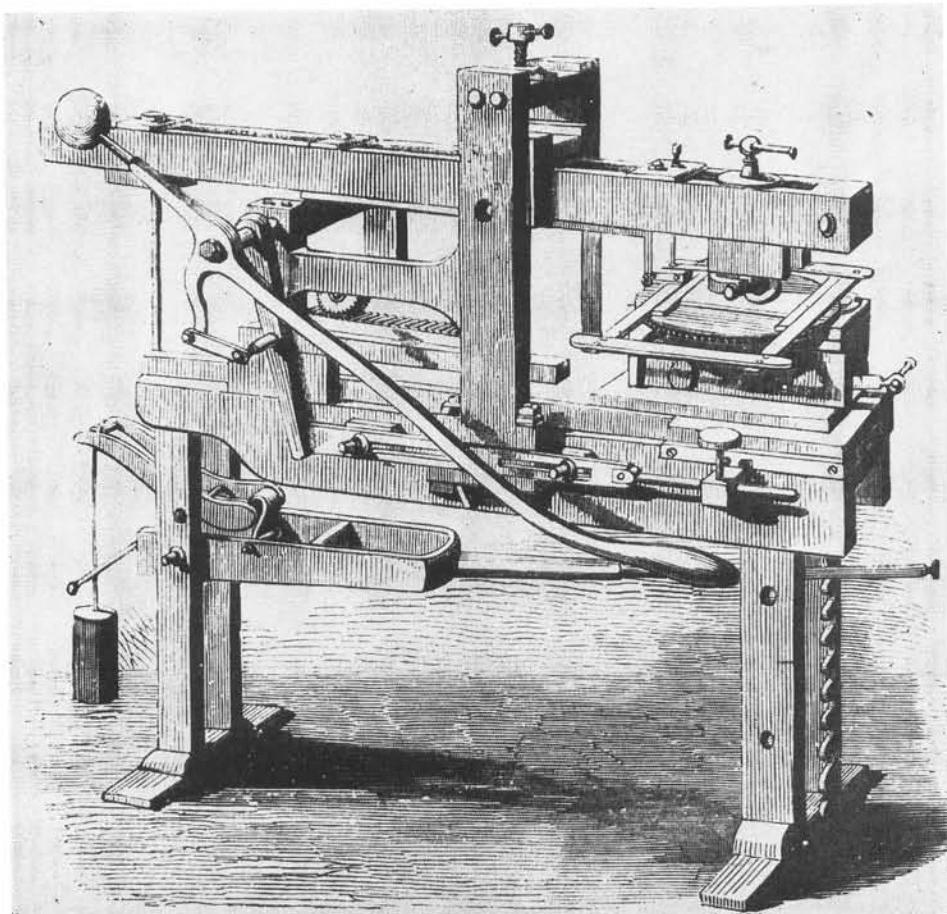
Drawing of Cyrus Durand's ruling machine.
